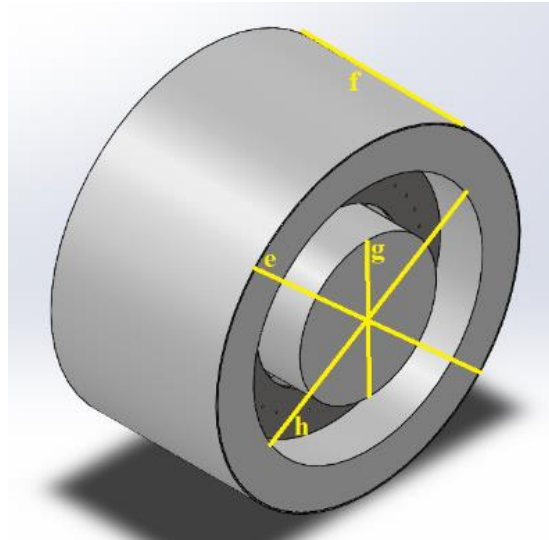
Perspective View of the Mechanical Drawing of the PHALL II-C Thruster
